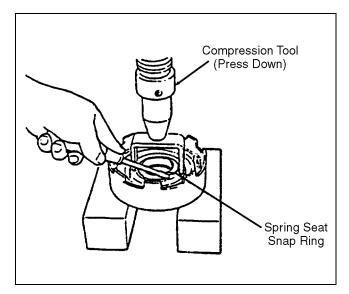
J-14. Direct Clutch Reassembly ó Step 6
